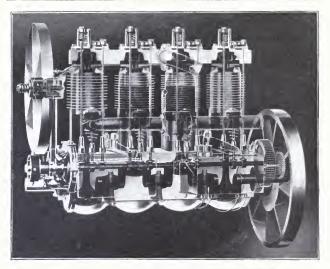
"Phantom" Drawing of 1908 Franklin Air-Cooled Engine. H. H. Franklin Manufacturing Company, Syracuse, N. Y.
